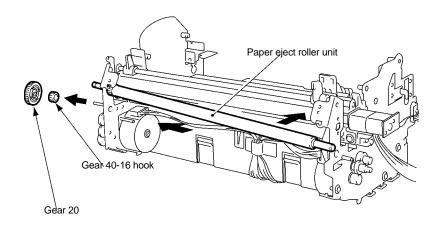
Installing the Paper Eject Roller Unit (1)
